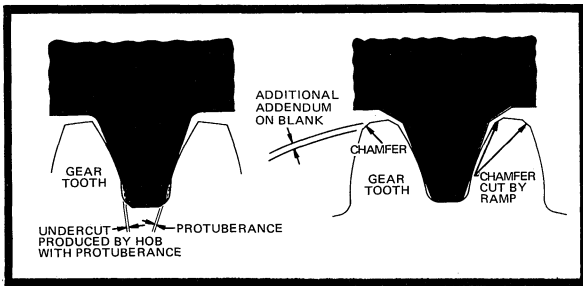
Typical hob tooth shapes. Protuberance type is at left, semi-topping type at right. *Courtesy Star Cutter Co.
